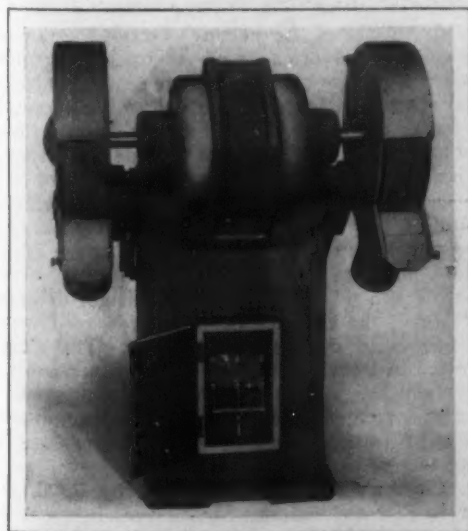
A New Type of Motor-Driven Band Finishing Machine with the Wheels Mounted on the Motor Armature Built by the Gardner Machine Company, Beloit, Wis.
